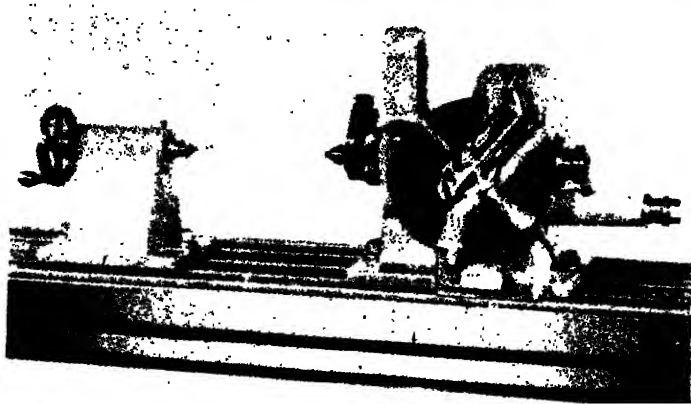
The spiral-milling head. (*The Cincinnati Milling Machine Company*)
